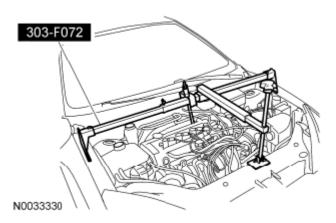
Installing Engine Support Bar Courtesy of FORD MOTOR CO.
